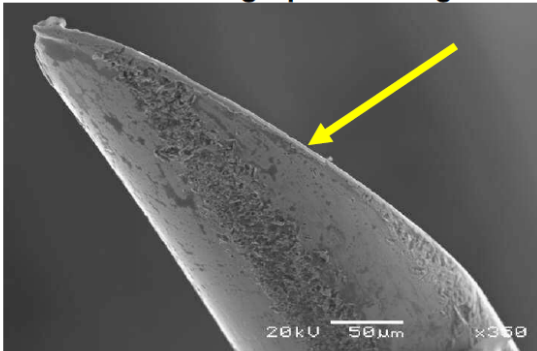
Fractograph showing typical outer strand wire fracture geometry (x550, SEM)
